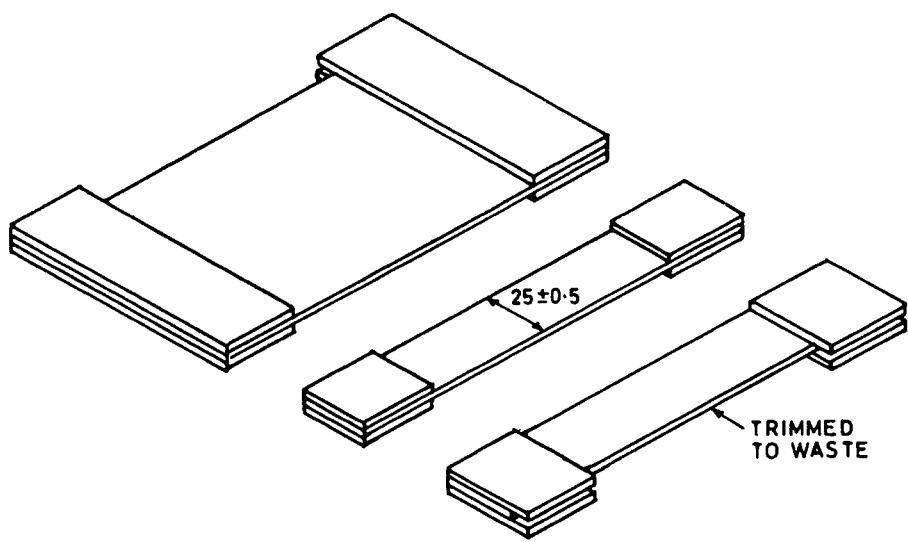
METHOD OF PREPARING SPECIMENS WITH ATTACHED END PIECE FROM TEST BLANK
